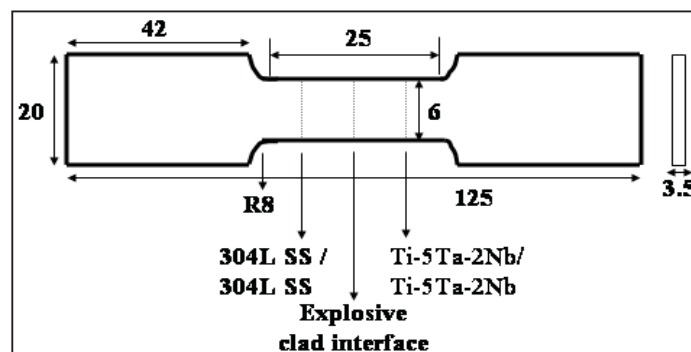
Schematic showing transverse tensile test specimen of SS/TiTaNb explosive joint (all dimensions are in mm)
